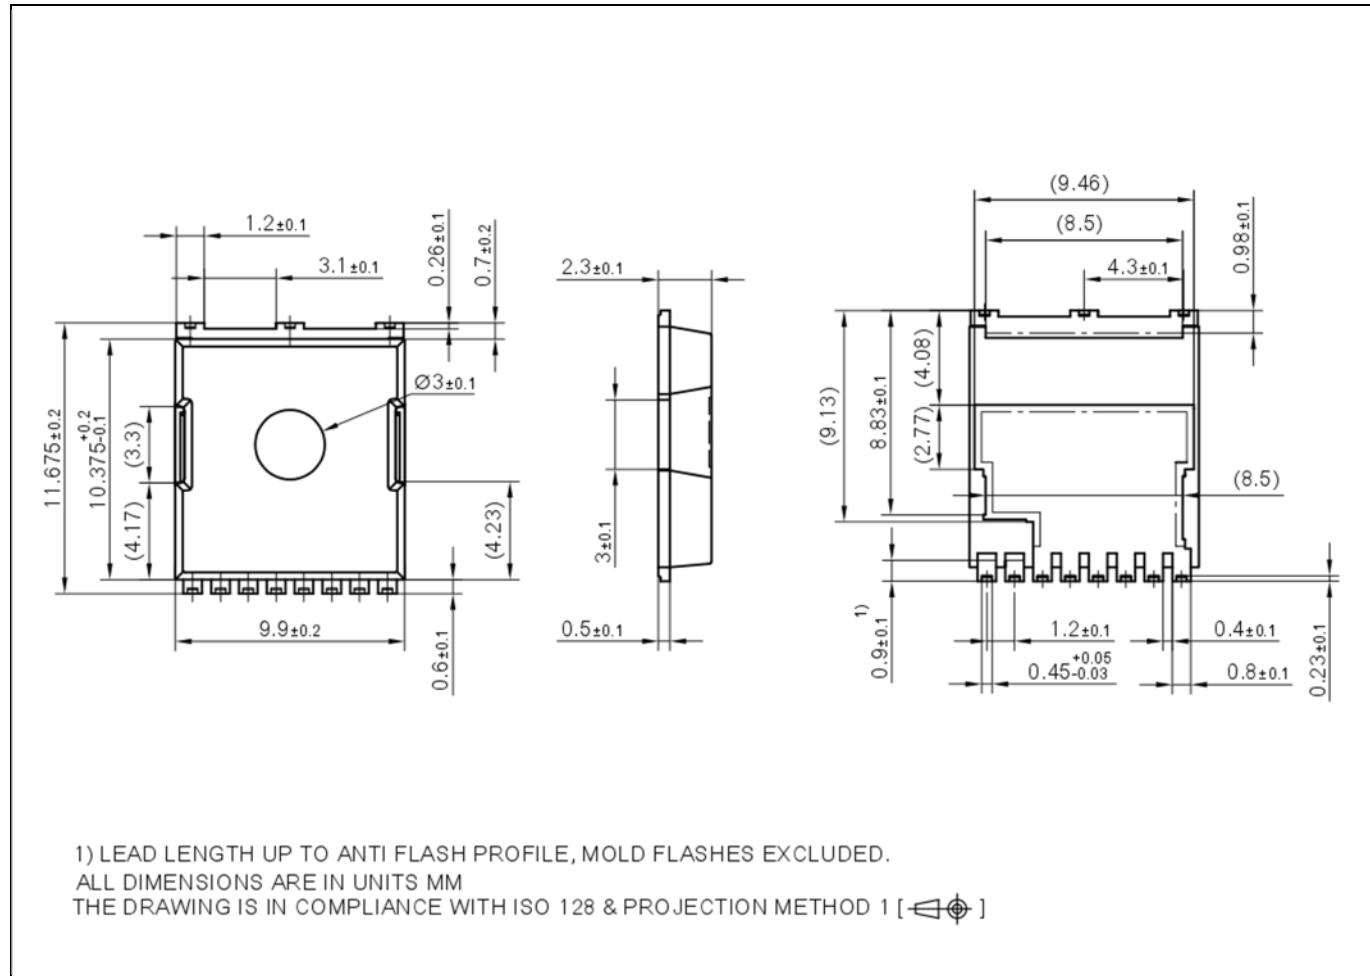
PG-HSOF-8 Package Outline, dimensions (mm)
